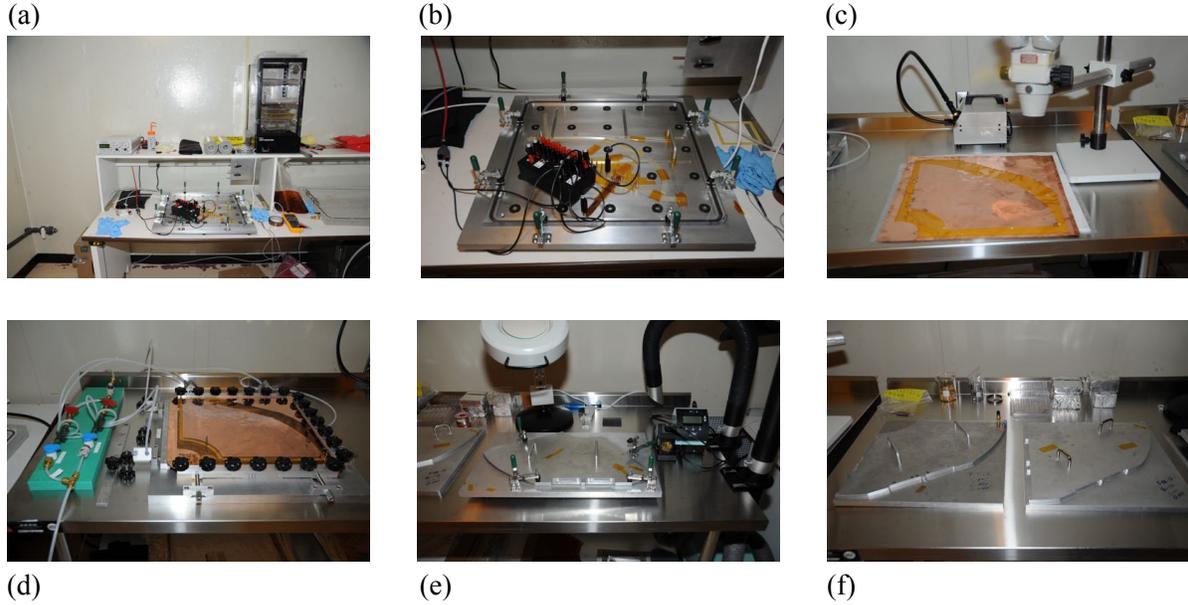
The testing and assembly fixtures include the leakage current setup (a-b), a microscope inspection station (c), a GEM foil stretching fixture (d), a soldering fixture with a new soldering exhaust fume setup (e) and two assembly fixtures (f) with special covers allowing gas flow after each assembly setup to verify that the leakage current performance has not been altered during a previous assembly step.
